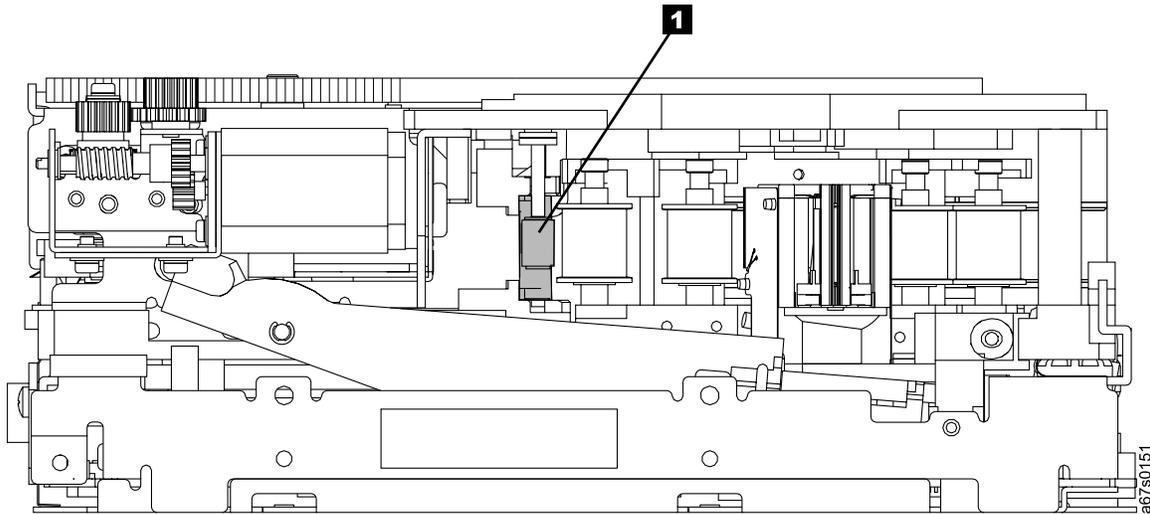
Rotating the loader motor gear until the leader block is fully inside the drive. The drive is shown on its side. The head is on the right and the arm of the head brush at the bottom of the figure.
